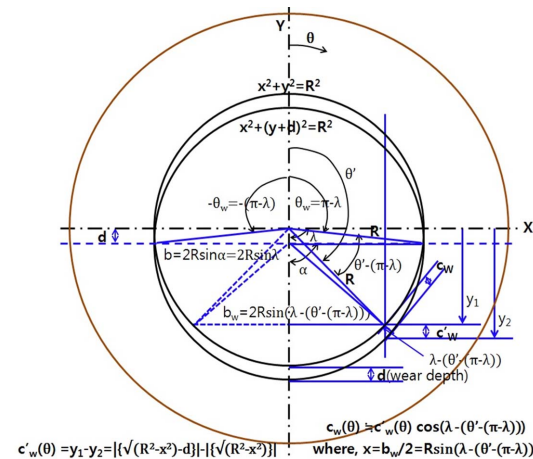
The additional space for oil film thickness created by the surface wear scar of a journal bearing.
